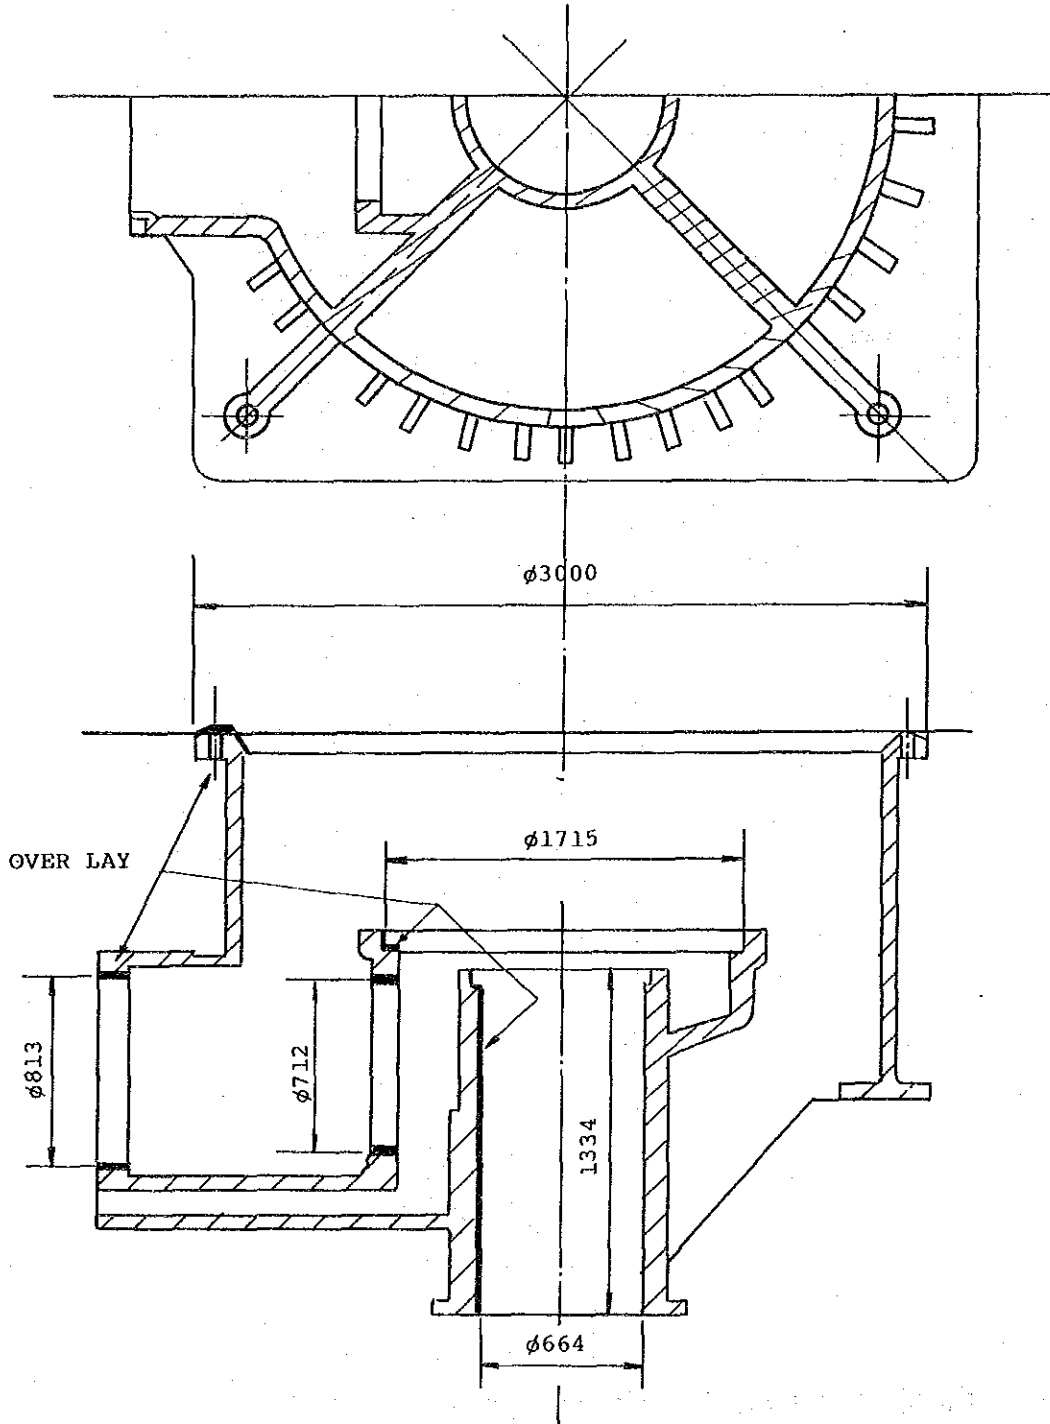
(4/5) Representative part requiring overlay welding
